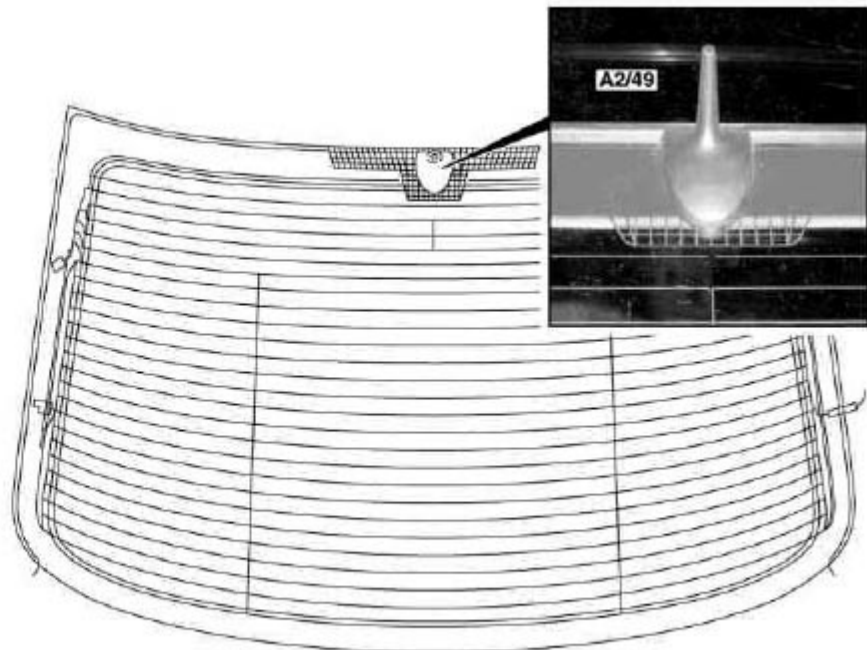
Identifying Spade-Type Contact System (LKS)-1.5-Pin
